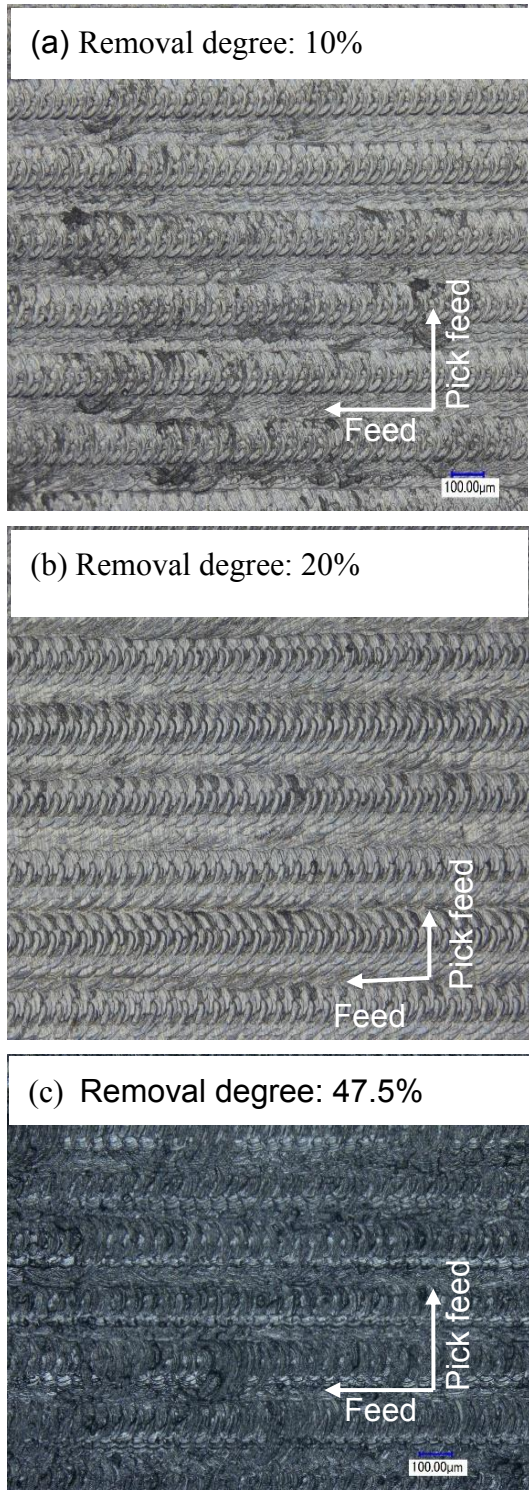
Images of machined surfaces at different removal degree using ball end mill.
